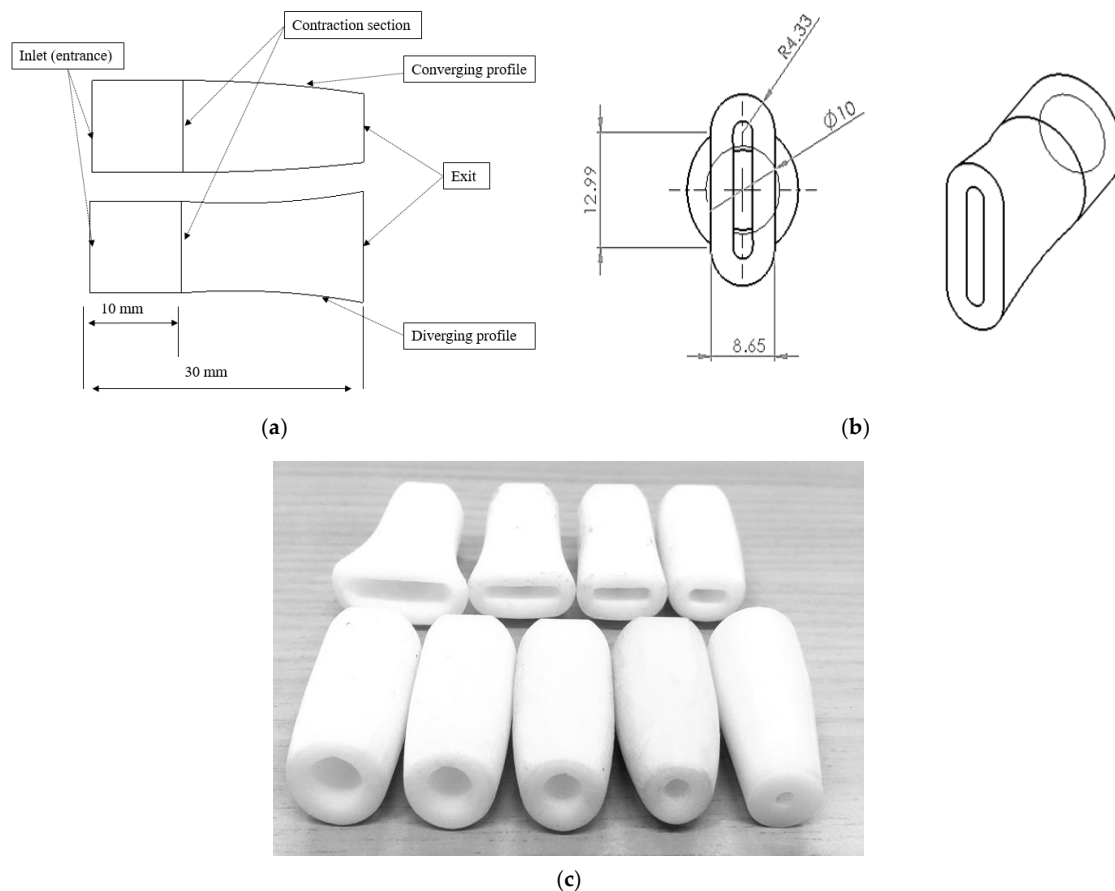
(a) Schematic representation of converging or diverging profiles of nozzles, (b) manufacturer supplied nozzle (R46) used in dynamic sheet forming and (c) 3D printed nozzles used for the present study. Note the following: all the dimensions include the wall thickness of 3 mm.
